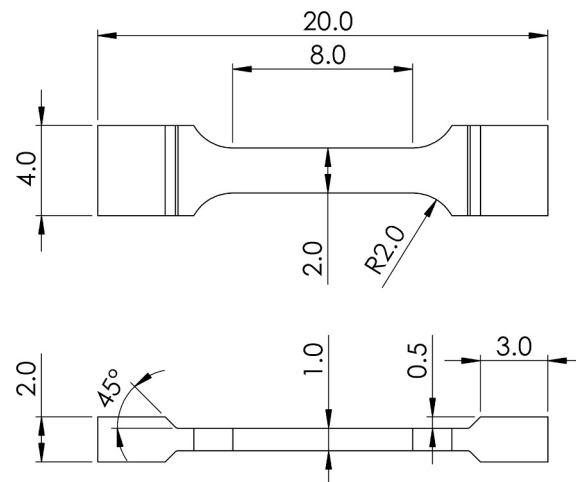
Technical drawing of miniaturized tensile test specimen. All dimensions are in millimeters.
